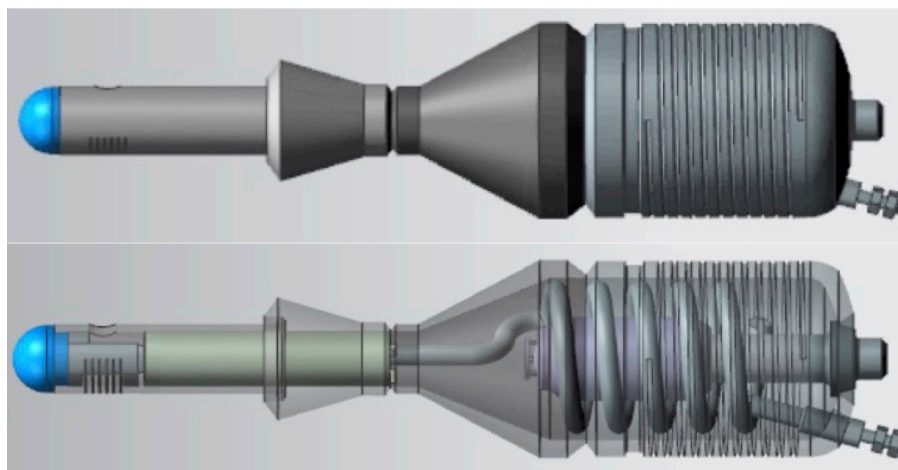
3D illustrations of compact nickel membrane probe assembly.
